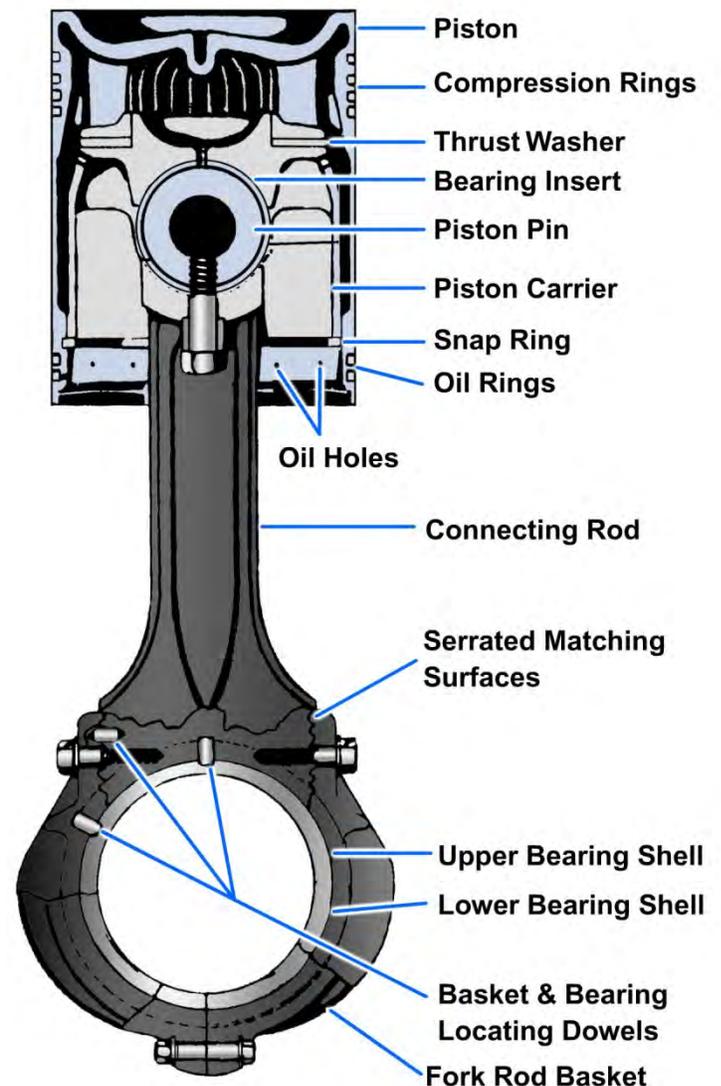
Cross section of a semifloating piston and connecting rod assembly.
